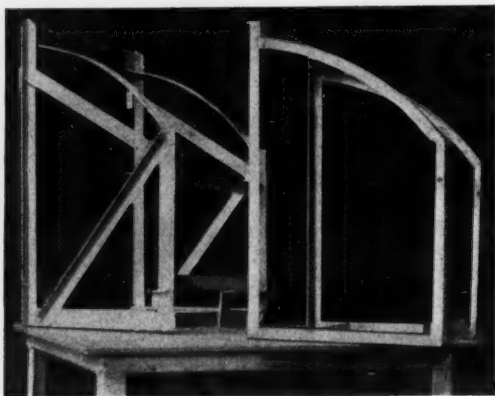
Drum Pouring Stand of Welded Construction
